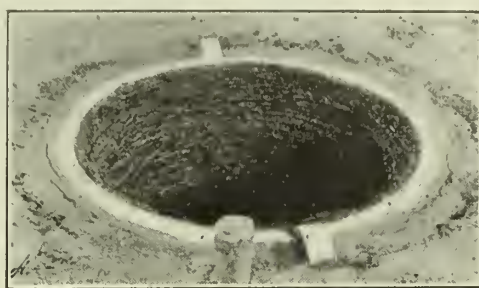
THE CASTING PHOTOGRAPHED AFTER THE WITHDRAWAL OF THE CORE.
